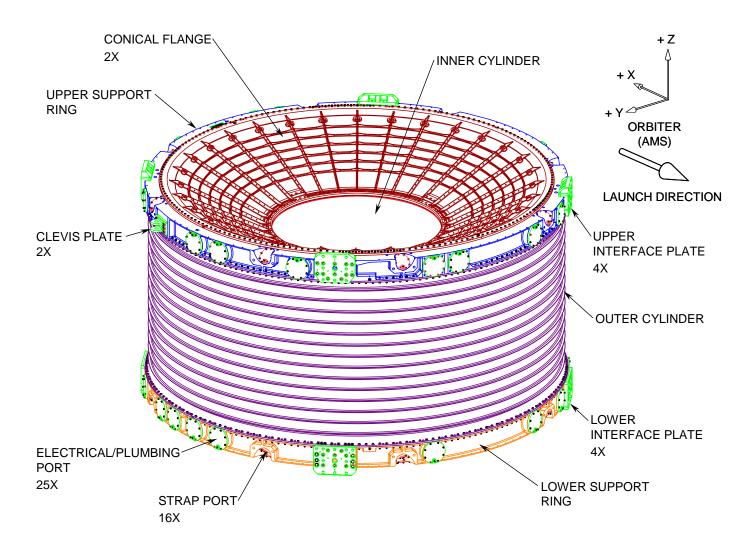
Vacuum Case Assembly (NASA Delivered)
